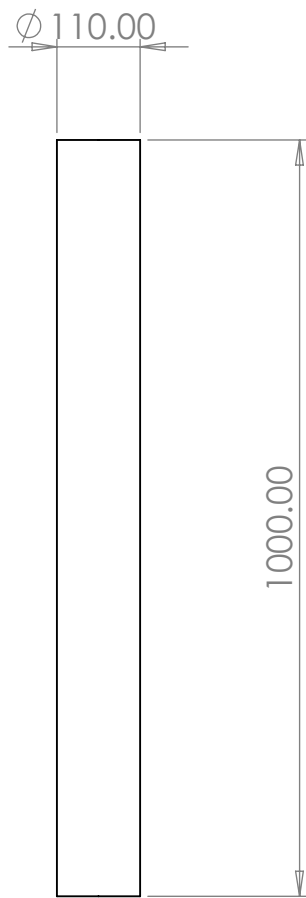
DETAILS: PIPE TO JOIN DABANE WELL-POINT
